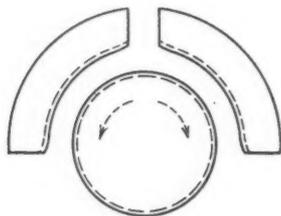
Schematic illustration of one possible form of an ultra high production planetary thread rolling machine.
